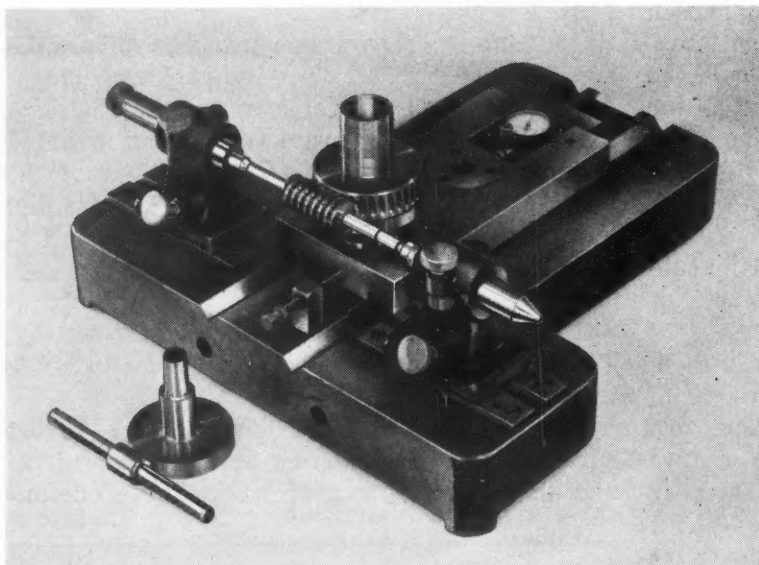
Another variable-center distance fixture designed for making a functional check of worm-gears. Master cylinders are seen at the front of the fixture
